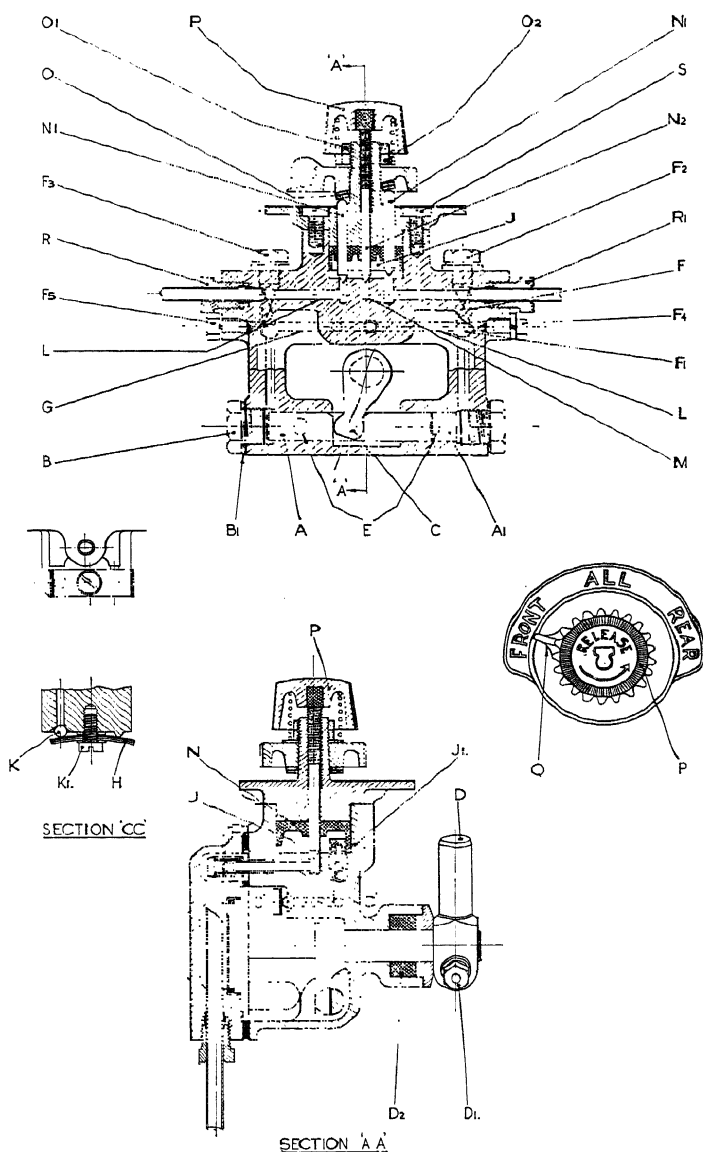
DISTRIBUTOR AND PUMP UNIT
